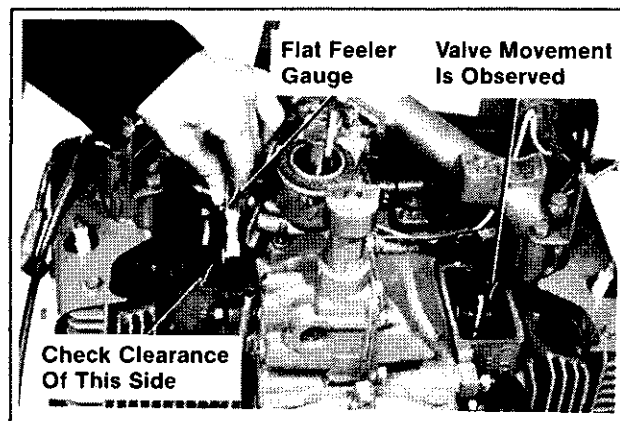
Measuring Valve-To-Tappet Clearance.
